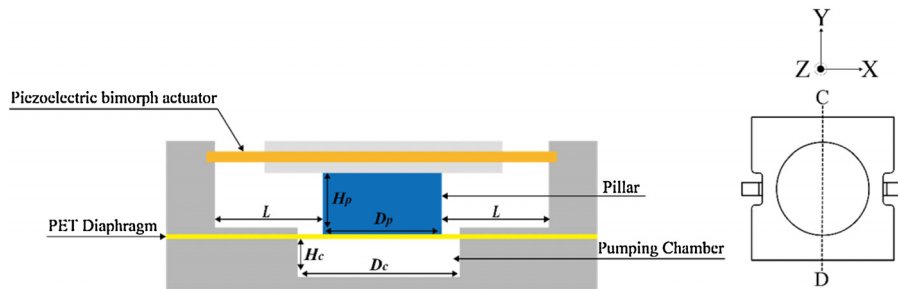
Cross-sectional view and top view of the disposable pumping chamber.
